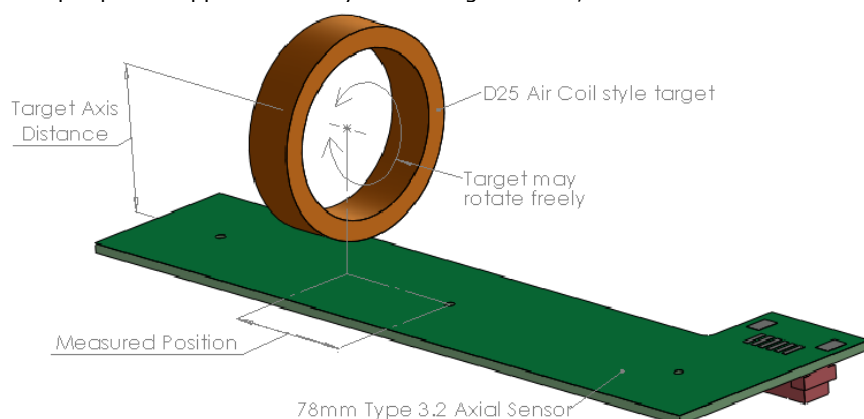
Sensor Assembly illustrated with D25 Air Coil Target
